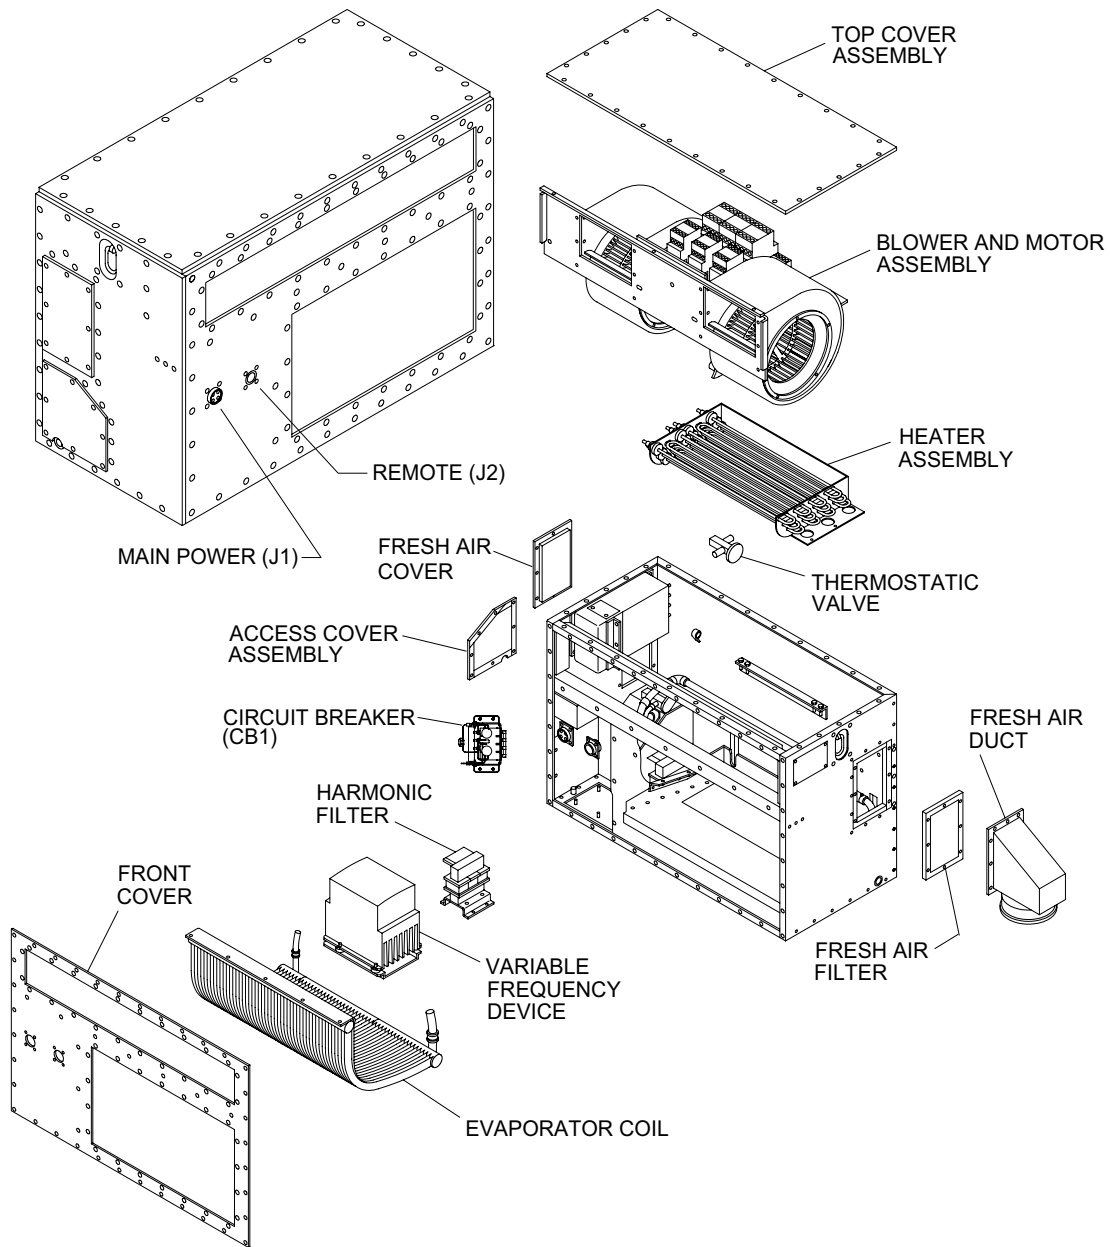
LOCATION OF MAJOR COMPONENTS (Evaporator Section).
